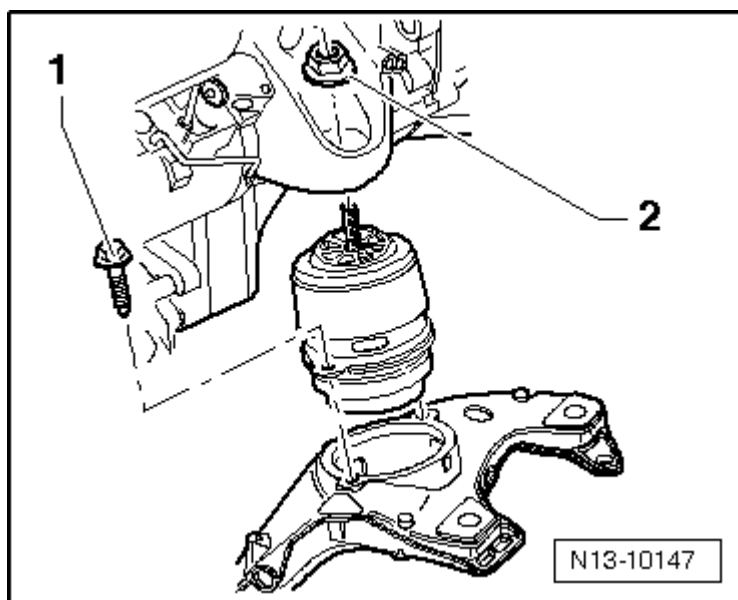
Identifying Nuts On Engine Mount At Left And Right Engine Supports
